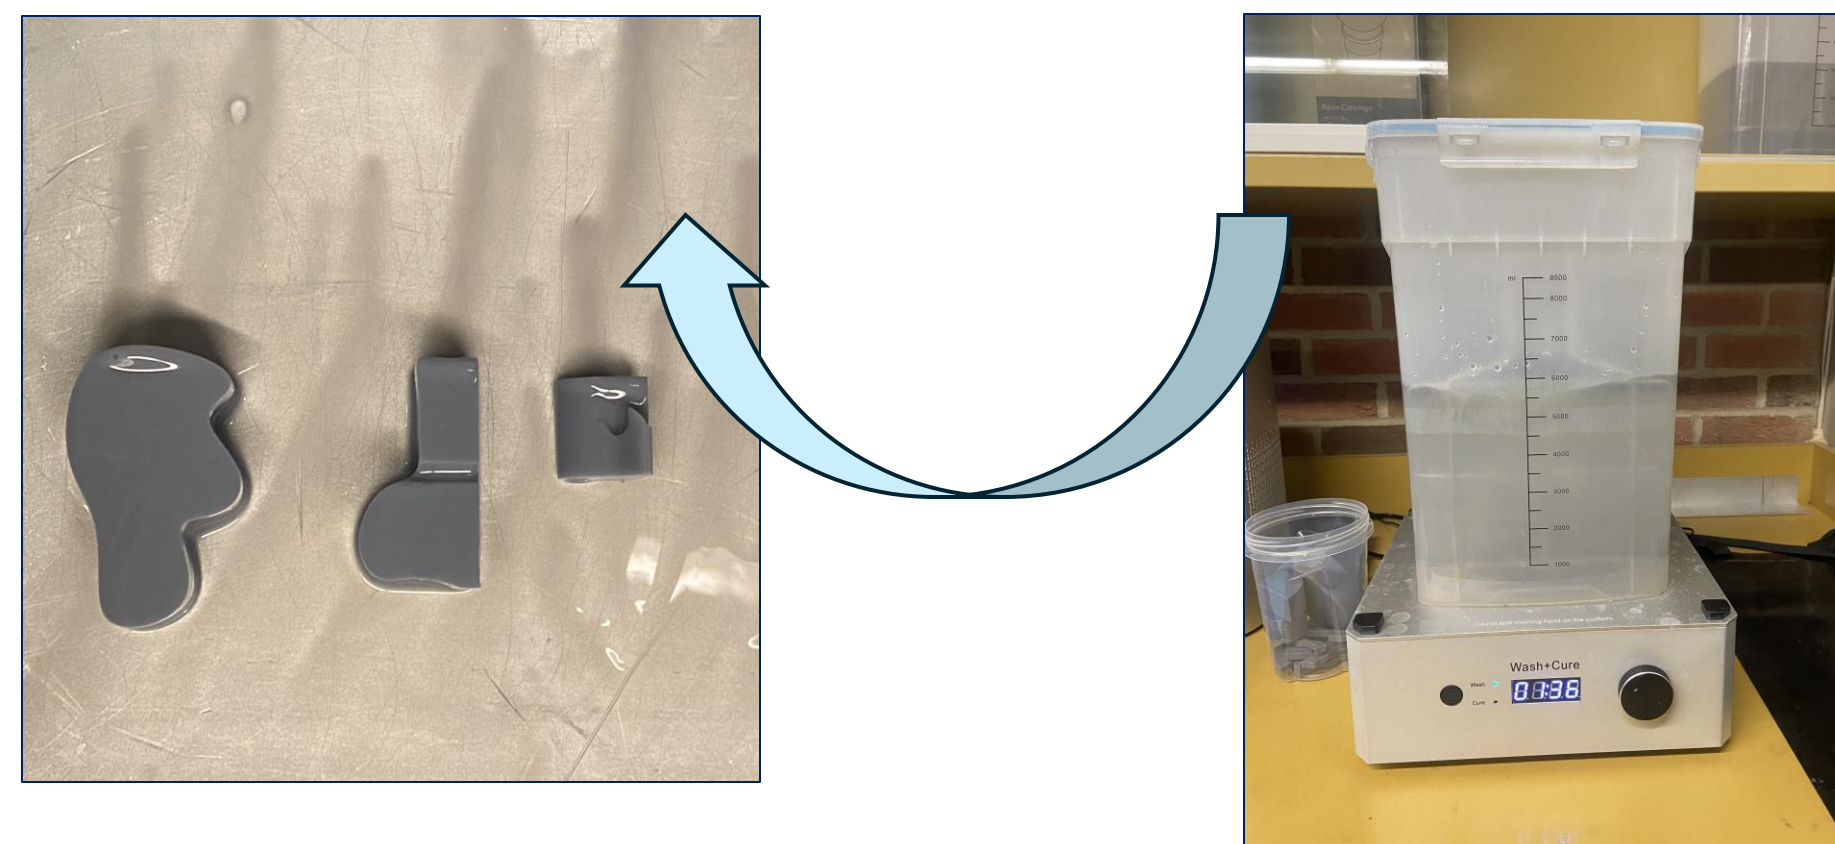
Newly created resin pieces to restore damaged Totem Pole.
